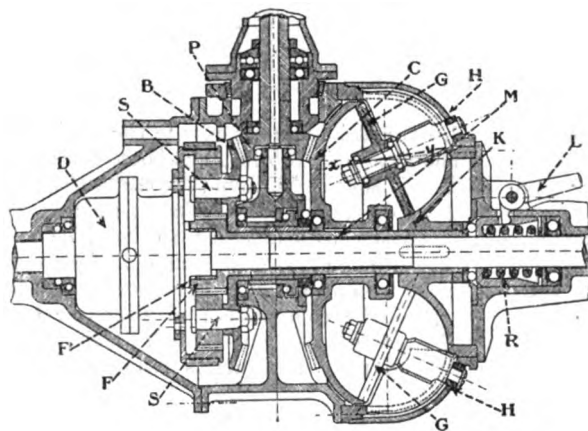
Sectional Plan of Combined Change-Speed Gear and Back Axle on D.S.R. Car.
